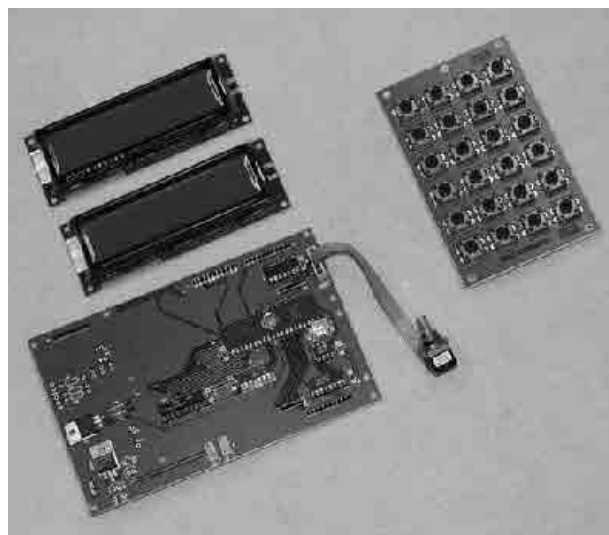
The command and control assemblies behind the front panel contain the main DFCB board (with microprocessor shown), the optoencoder, the 64 characters displays that plug into DFCB board and the key pad board, all interconnected with ribbon cables. See text.
